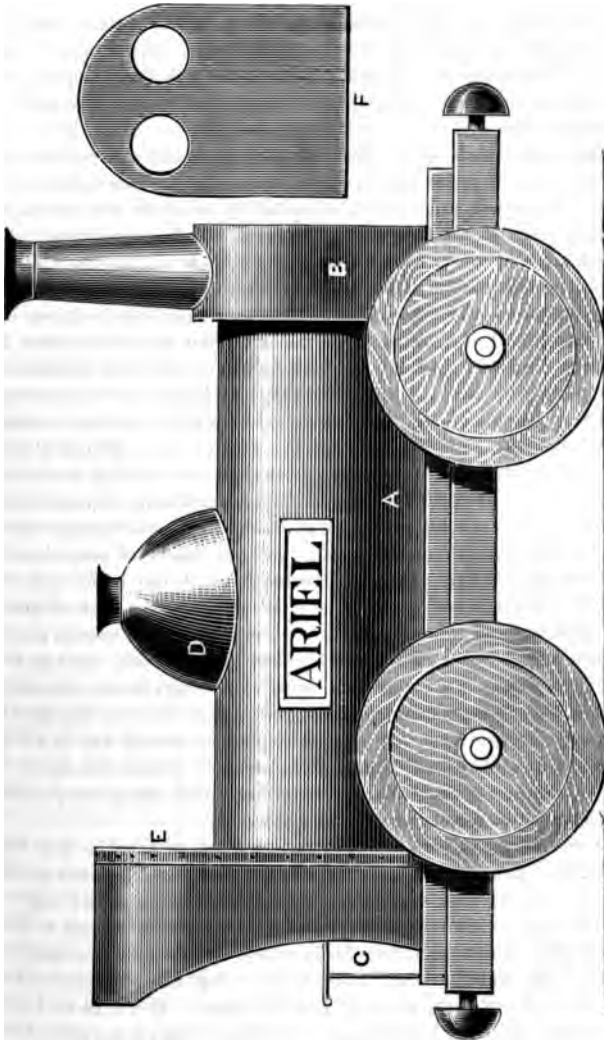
SIMPLE LOCOMOTIVE ENGINE.
